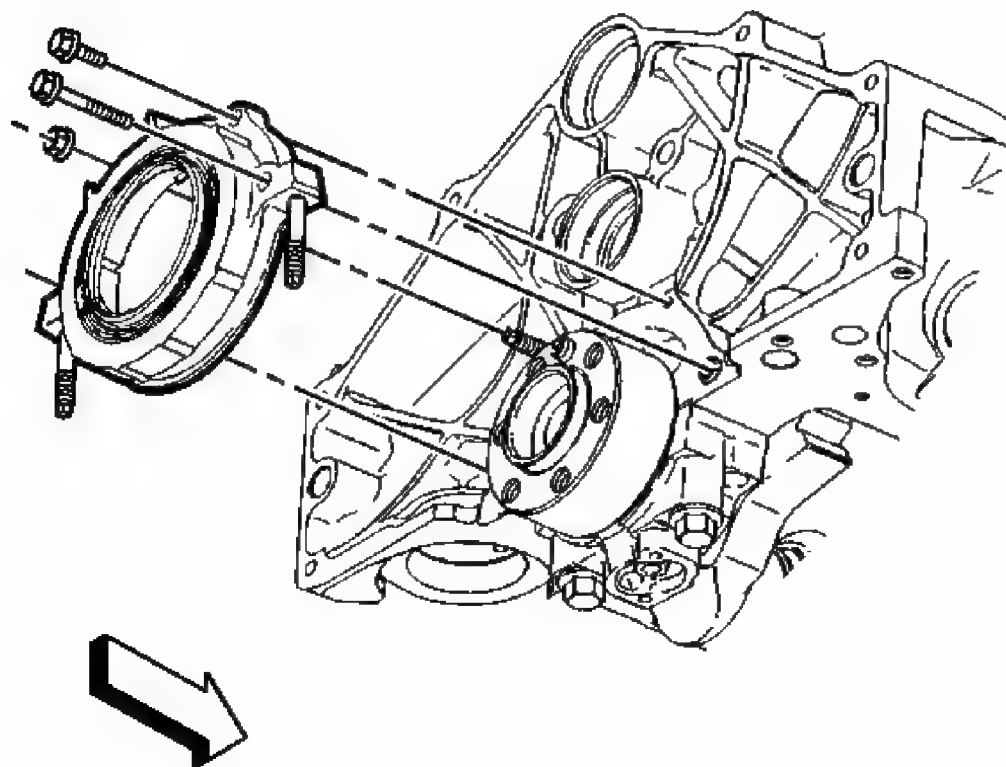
View Of Crankshaft Rear Oil Seal Housing
